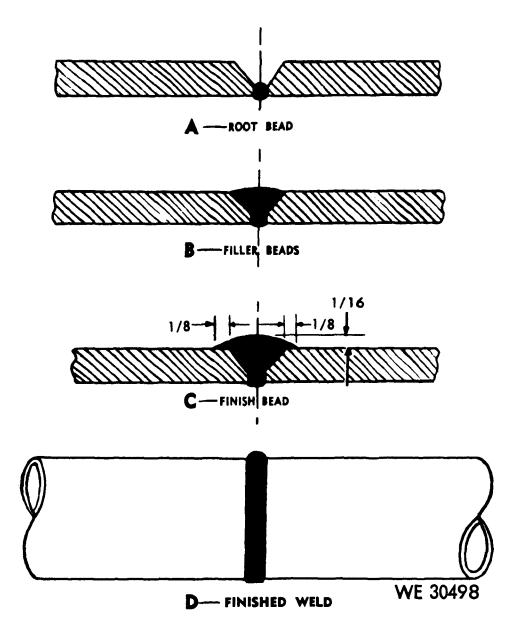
Deposition of root, filler, and finish weld beads.
